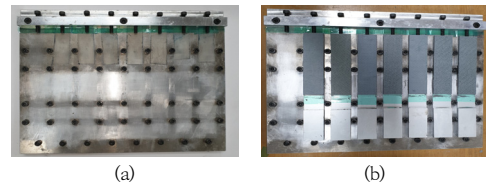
Jig to produce specimens of single lap joints (a) Jig without specimens (b) Jig with specimens
